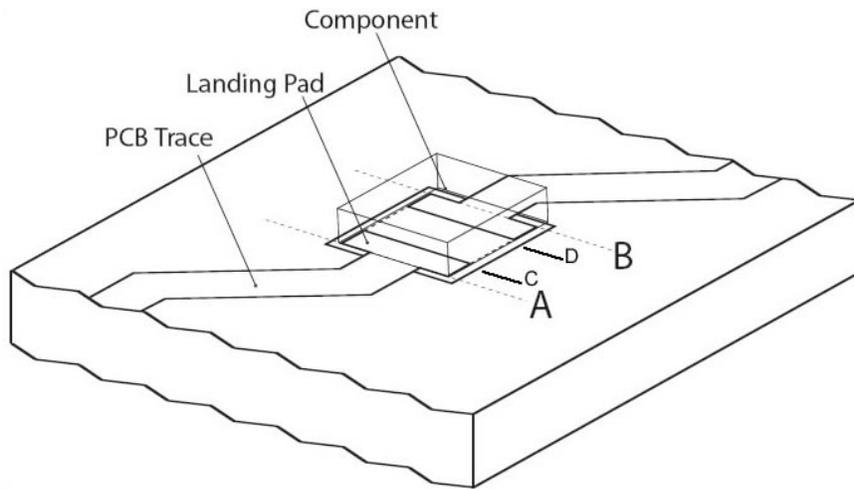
The footprint of an inductor on a PCB substrate consists of two landing pads. PCB traces connect each pad to other components on the board. The 0603 device which we solder onto the board has leads, which are the two metalized ends that sit on the footprint's pads. The bottom side of the board is a solid ground plane.
